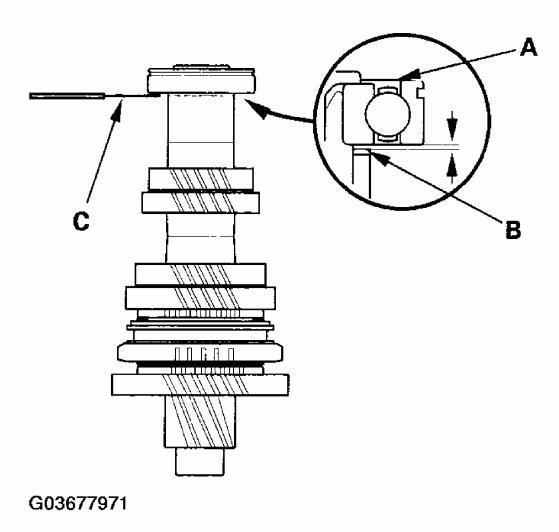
Measuring Clearance Between Old Bearing And Shim Courtesy of AMERICAN HONDA MOTOR CO., INC.
